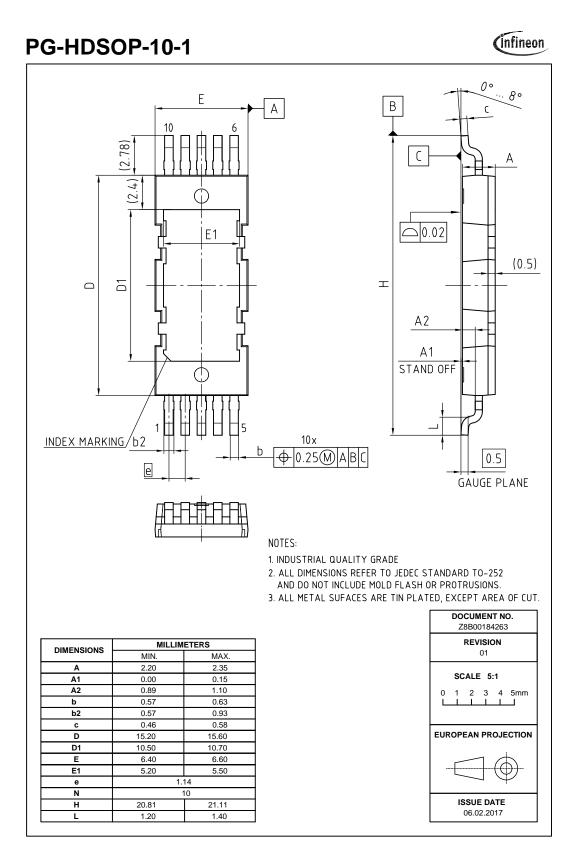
Outline PG-HDSOP-10, dimensions in mm/inches
